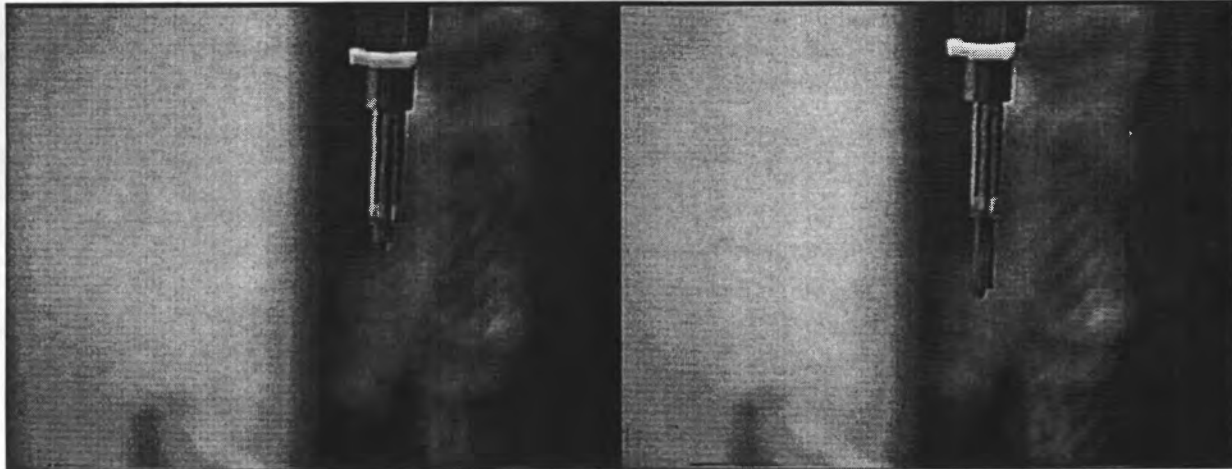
Modified Characterization Collet Tool for End Lifting Inner Element Fuel. Left view shows the collet engaged to lift the ID of a fuel element. Right view shows the collet disengaged for acquisition and release of fuel. Figure 4 shows the complete tool.
